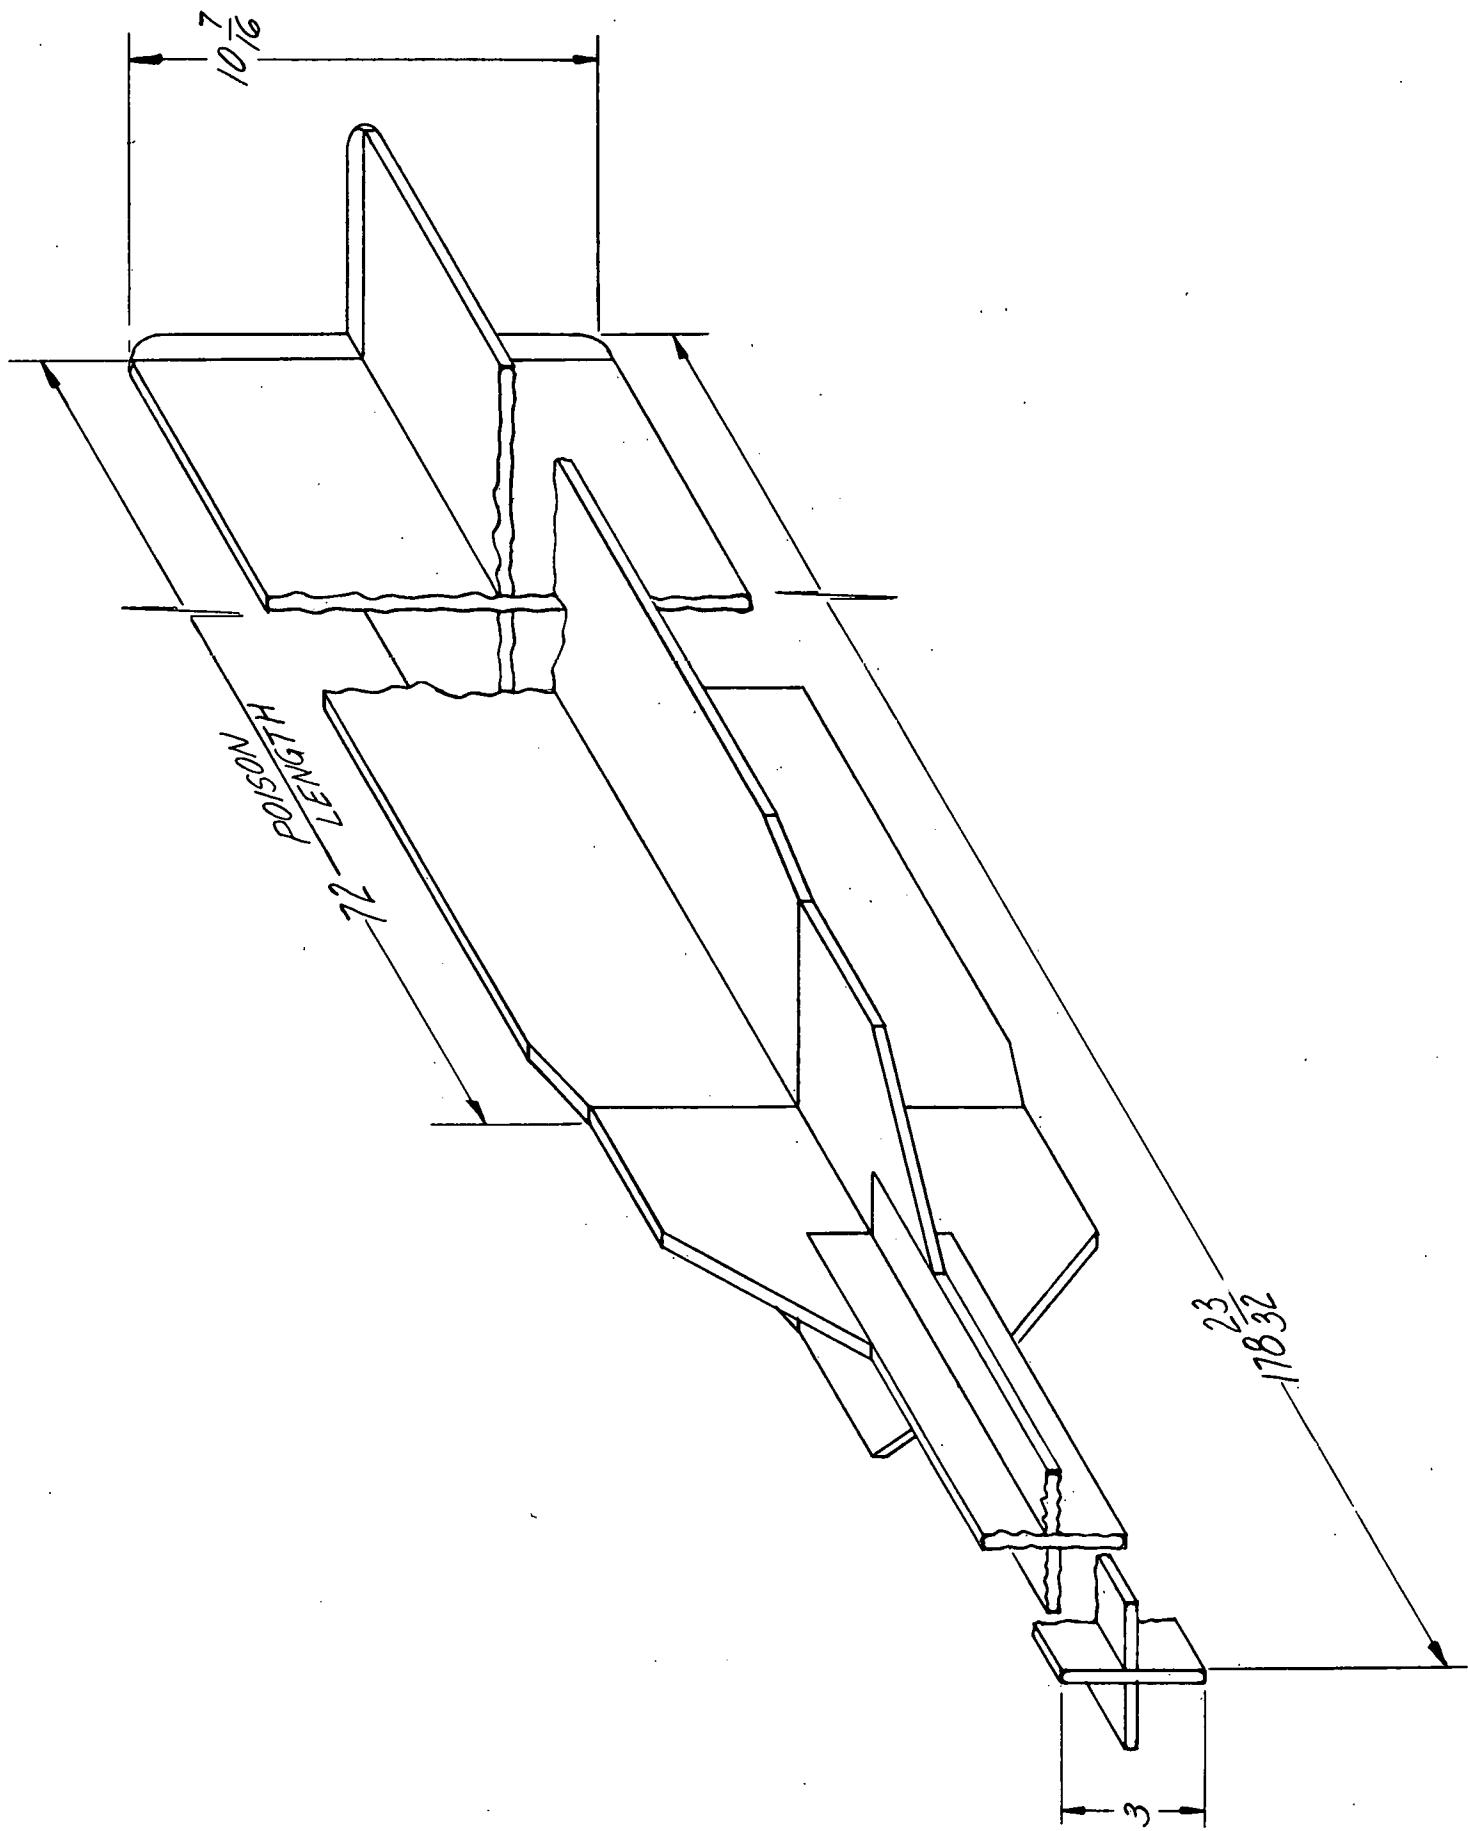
Boiler Cruciform Control Rod (43-025-345)
